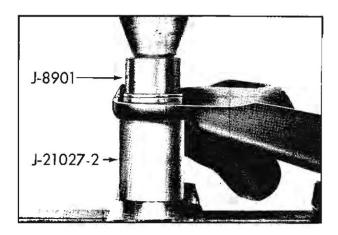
Installing New Ball Joint in Lower Control Arm
